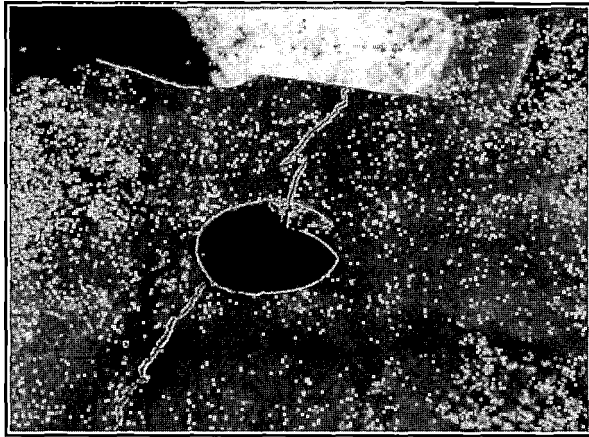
Crack in Casting of 76-Degree Crossing
